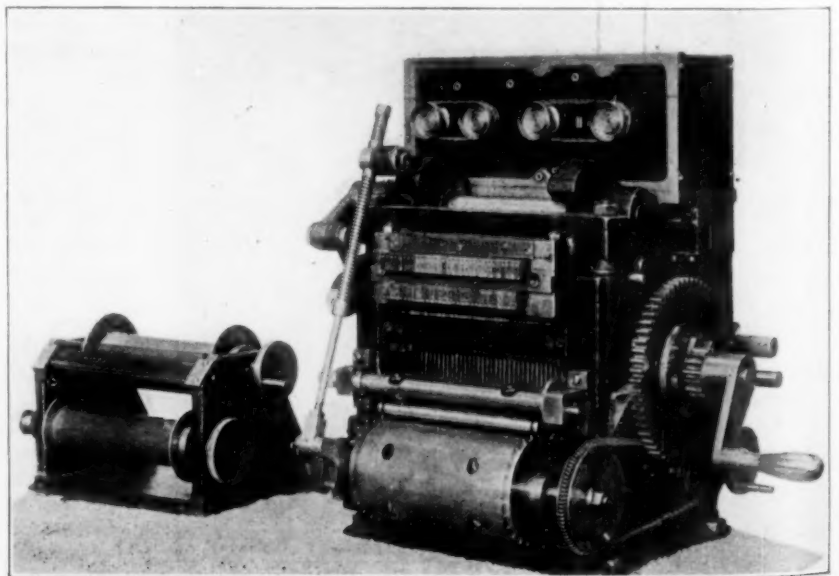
MECHANISM FOR PUNCHING PAPER TEMPLATES USED IN AUTOMATIC PUNCHING MACHINE SHOWN IN FIG. 6. THE PUNCHED TEMPLATE IS CHECKED ON THE ROLLS SHOWN AT THE LEFT
